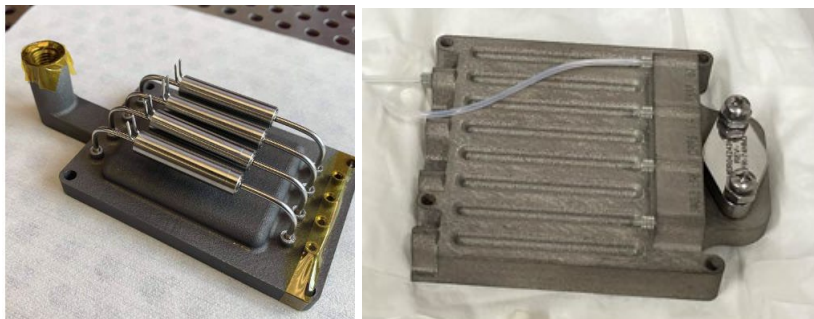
A) Specter AM Braze CPRS Design. B) AM Fitting-joint CPRS Design.
